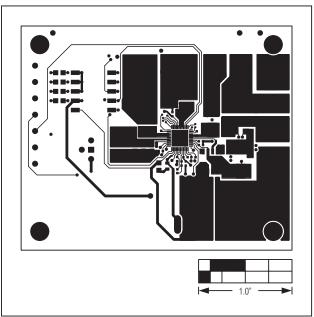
MAX17019 EV Kit PCB Layout—Component Side
